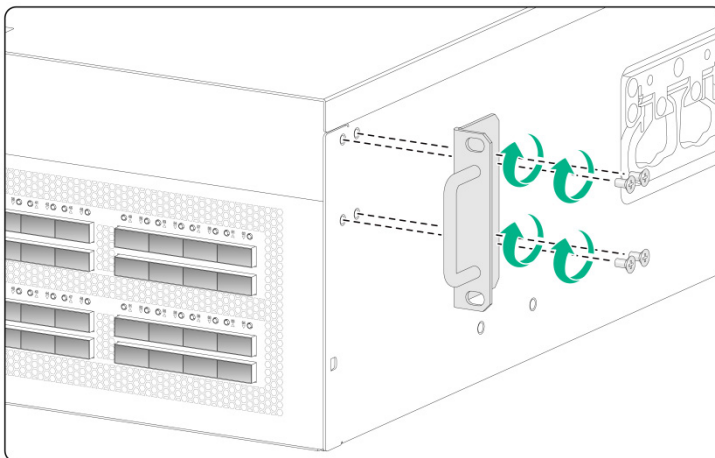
Attaching the mounting brackets to the S9825-128B switch
